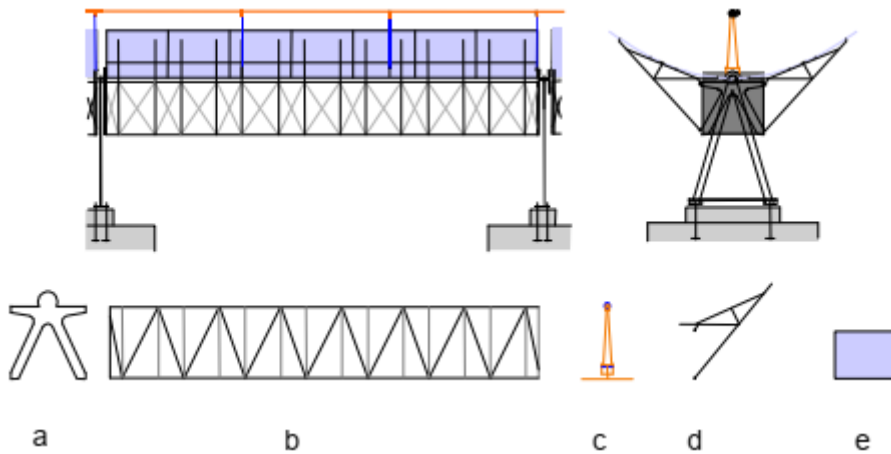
EuroTrough collector element consisting out of (a) 2 endplates; (b) 4 simple steel frames screwed to a torque box; (c) 3 absorber tube supports; (d) 28 cantilever arms and (e) 28 mirror facets [92]
